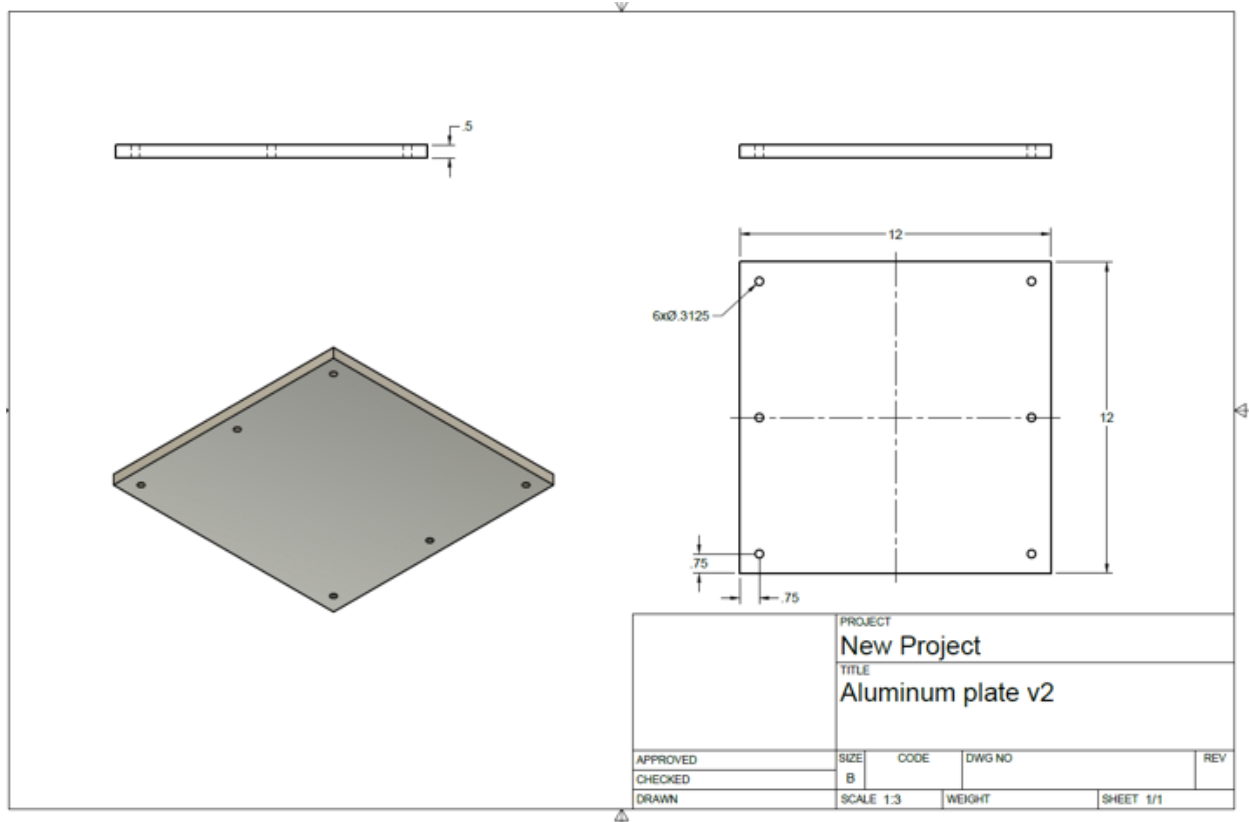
Aluminum base plate providing a rigid mounting surface and fastening points for the GHFM assembly.
